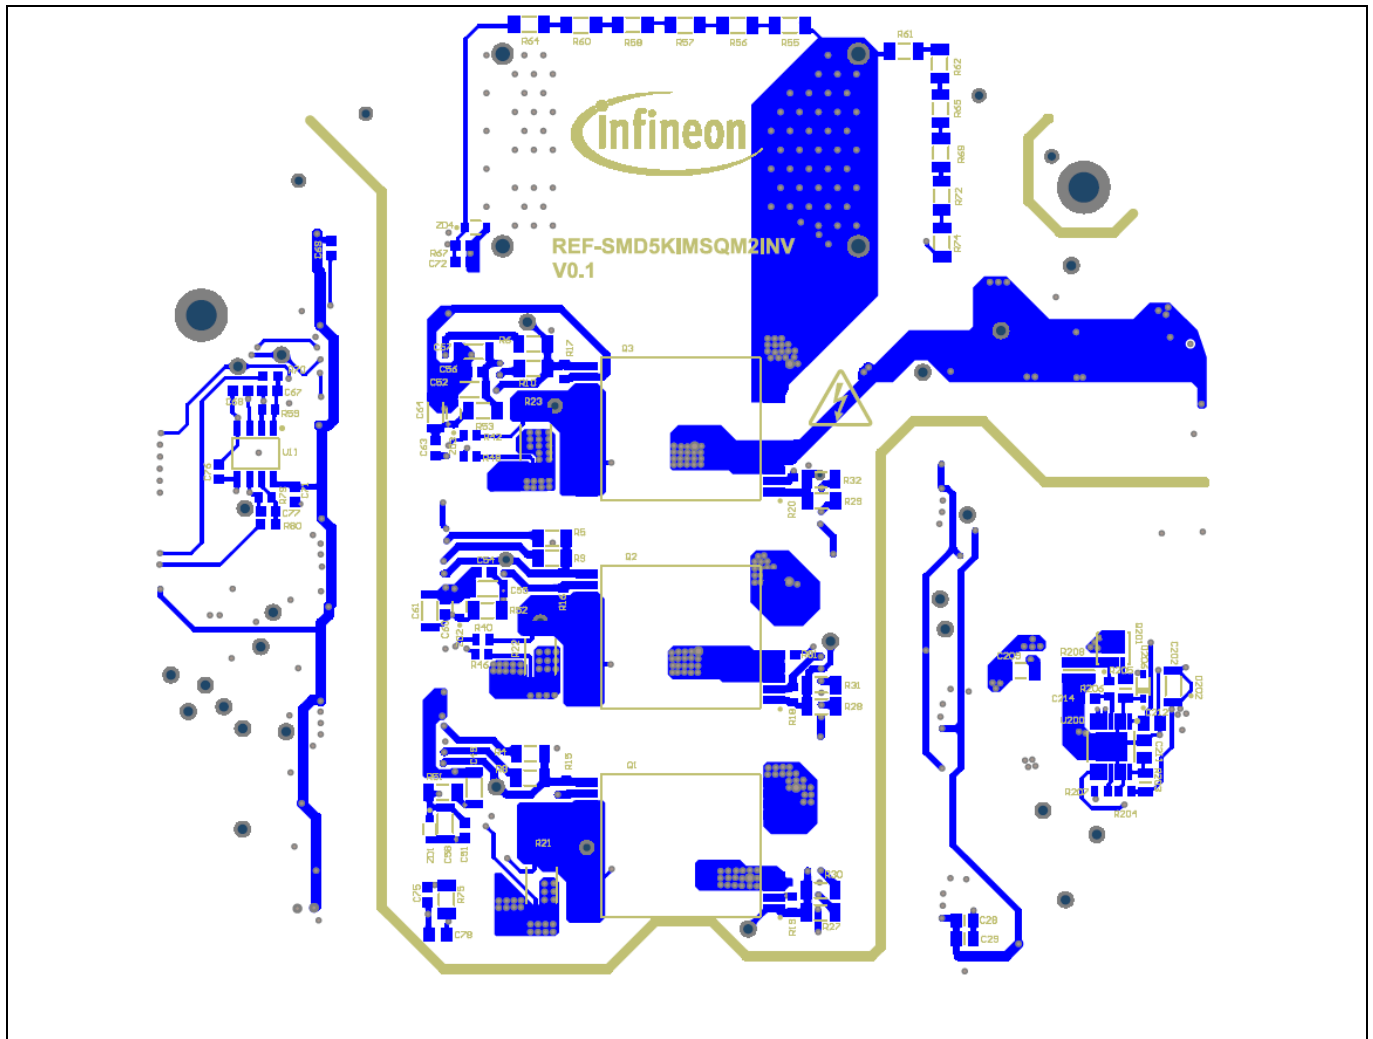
Bottom layer REF-SMD5KIMSQM2INV
